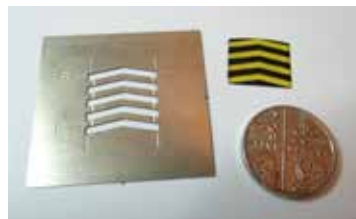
The rear of the etched stencil along with a test piece (yours would be already assembled to the U channels etc.).
